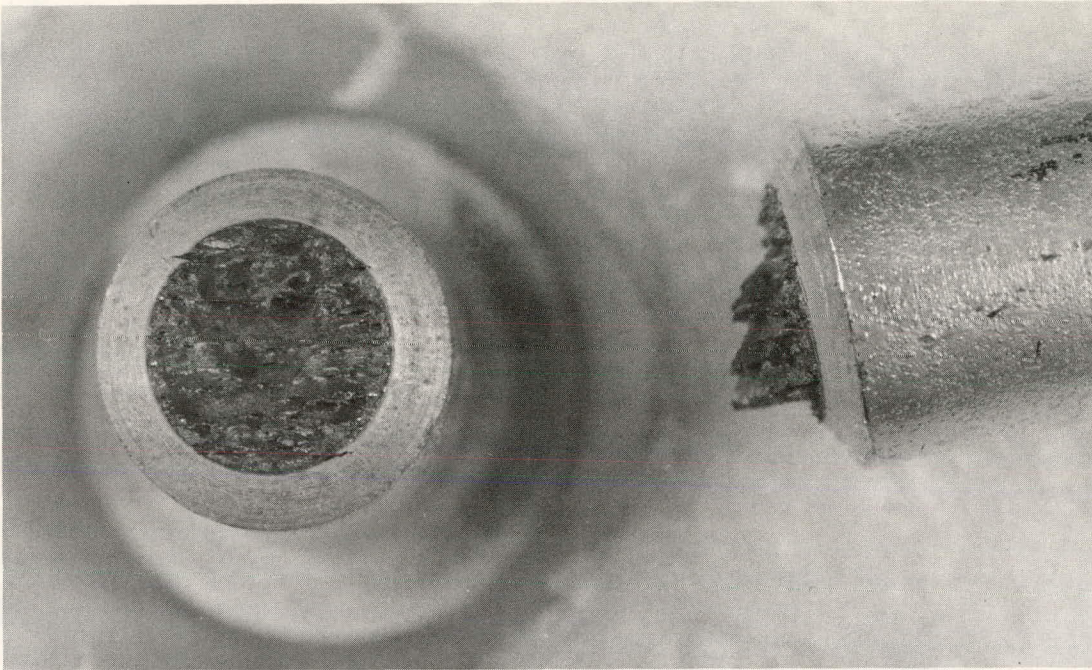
Fracture Surface at High Magnification (High Charge, Unirradiated); Specimen X of Fig. 31
